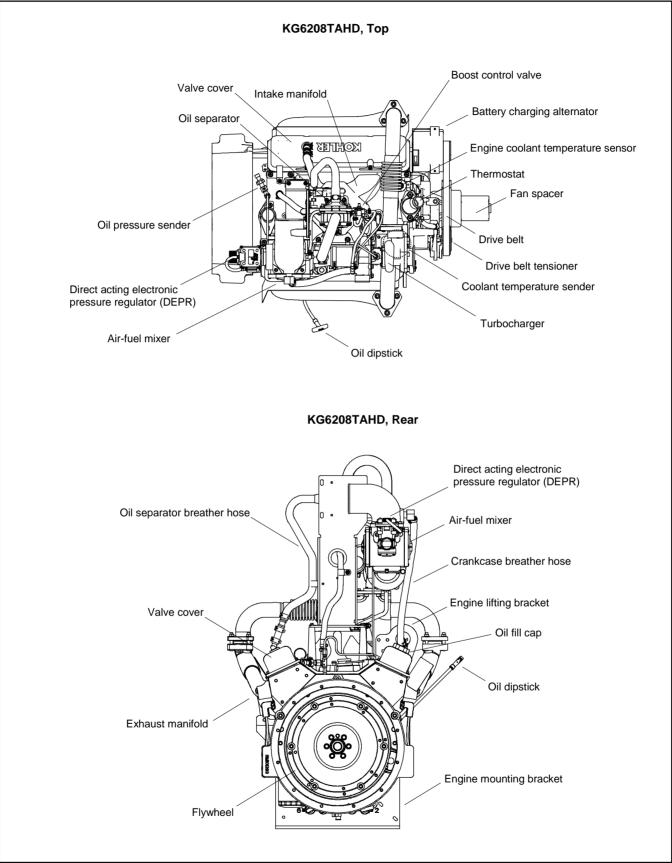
KG6208TAHD, Heavy Duty Turbocharged Engine Top and Rear Views
